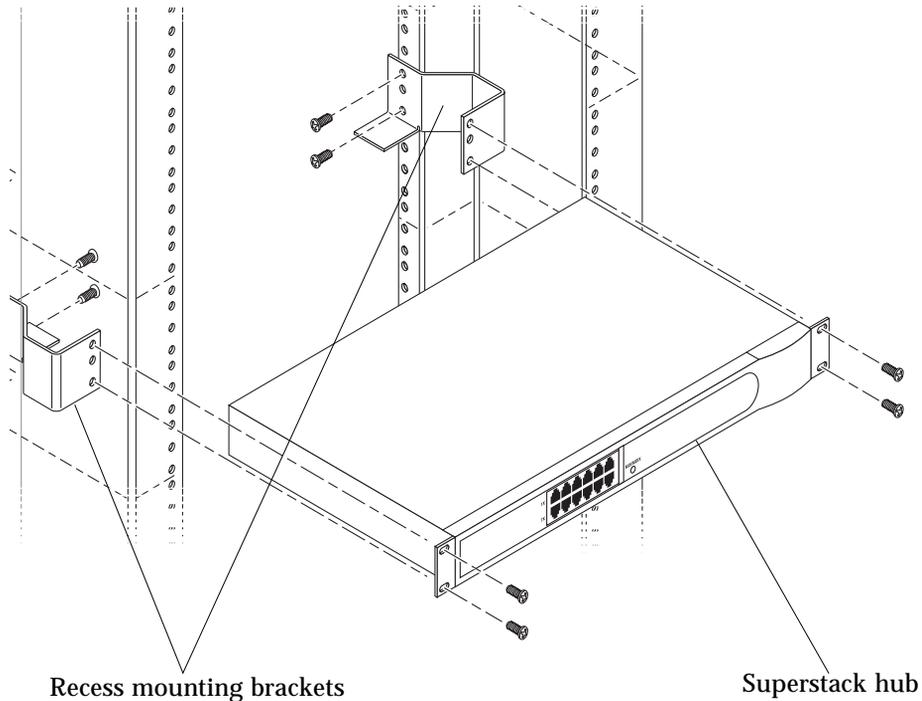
Superstack Hub in Recess Mounting Brackets—Rear View
